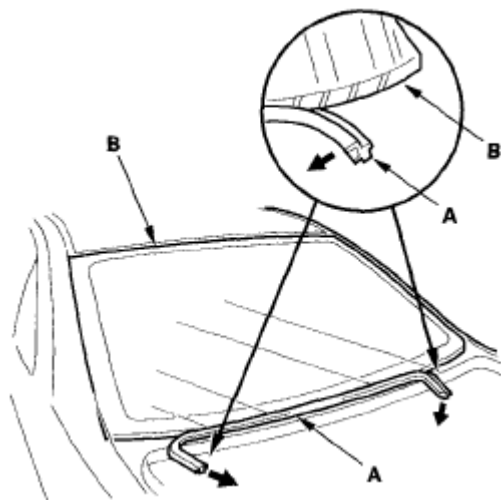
Removing Lower Rubber Dam From Lower Edge Of Rear Window
